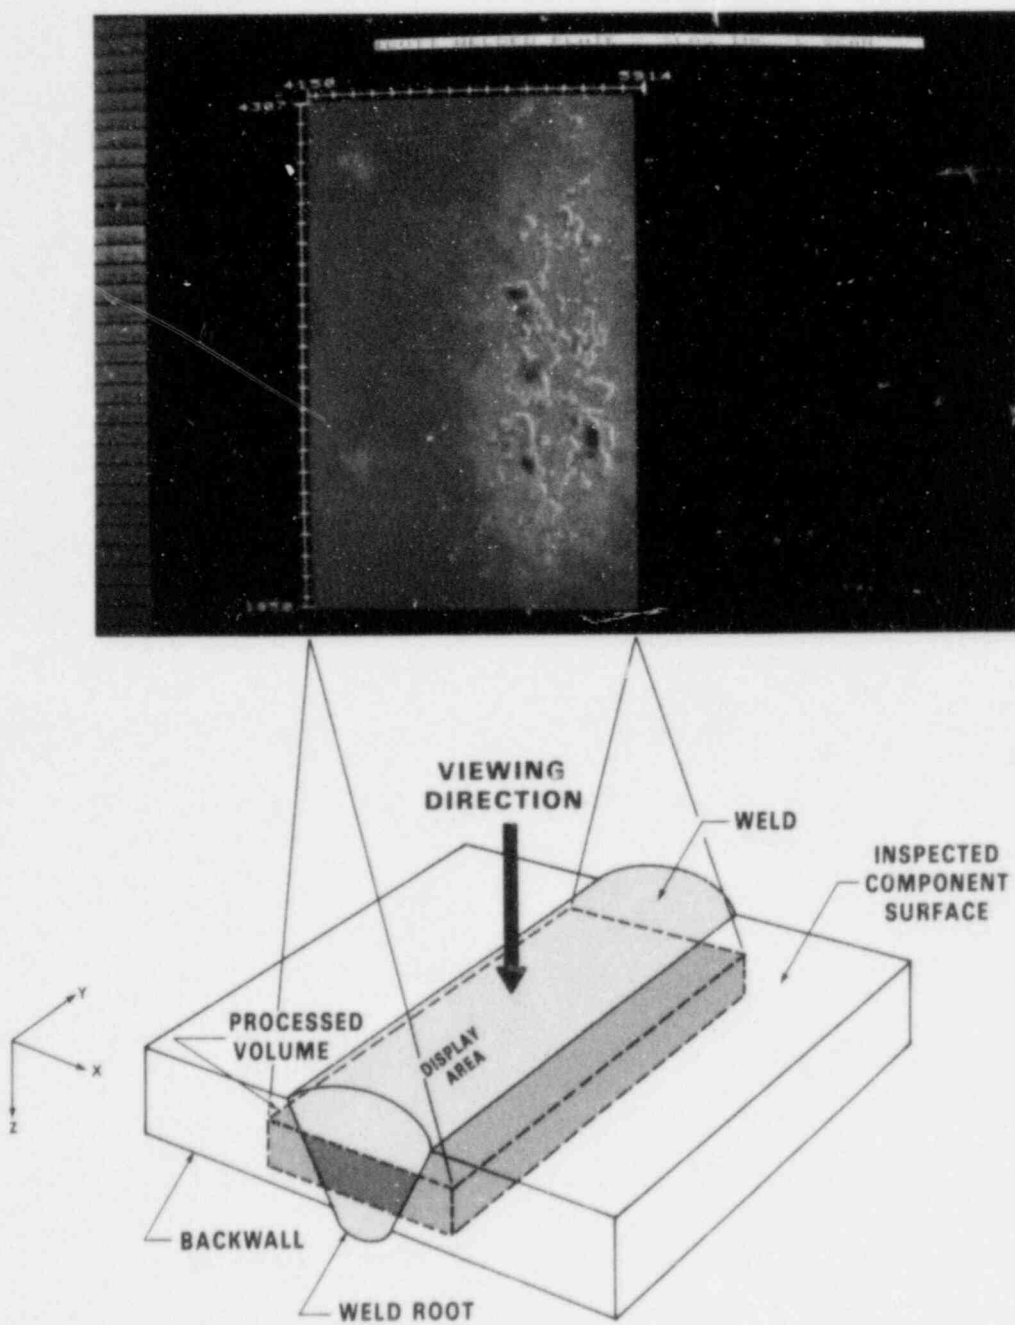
BUTT-WELDED CARBON STEEL PLATE SPECIMEN - SLAG INCLUSION
